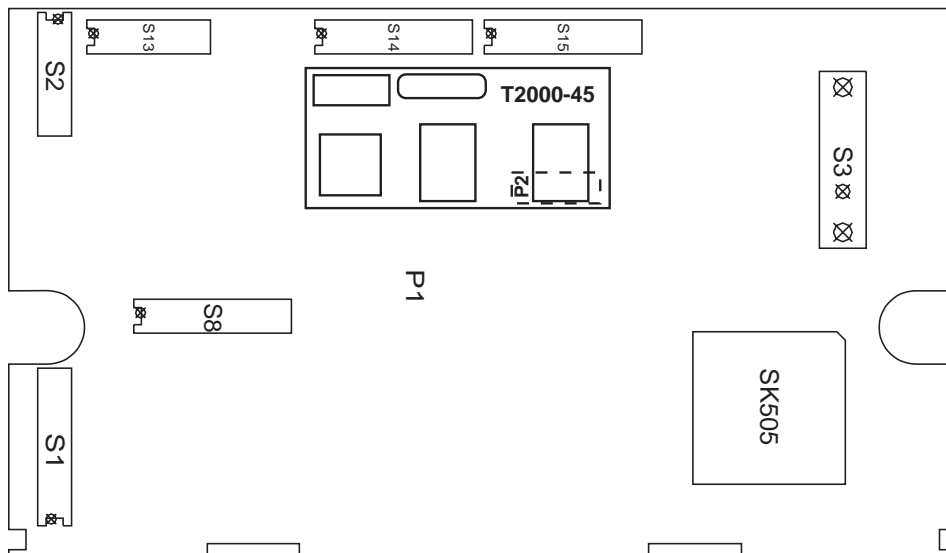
T2000-A450X PCB Mounting (T201X logic PCB shown)
